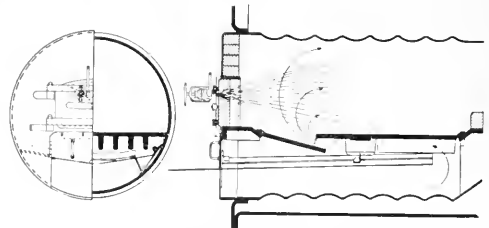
Furnace Arrangement on "Brouwer" Using Mechanical Spray Burners.
